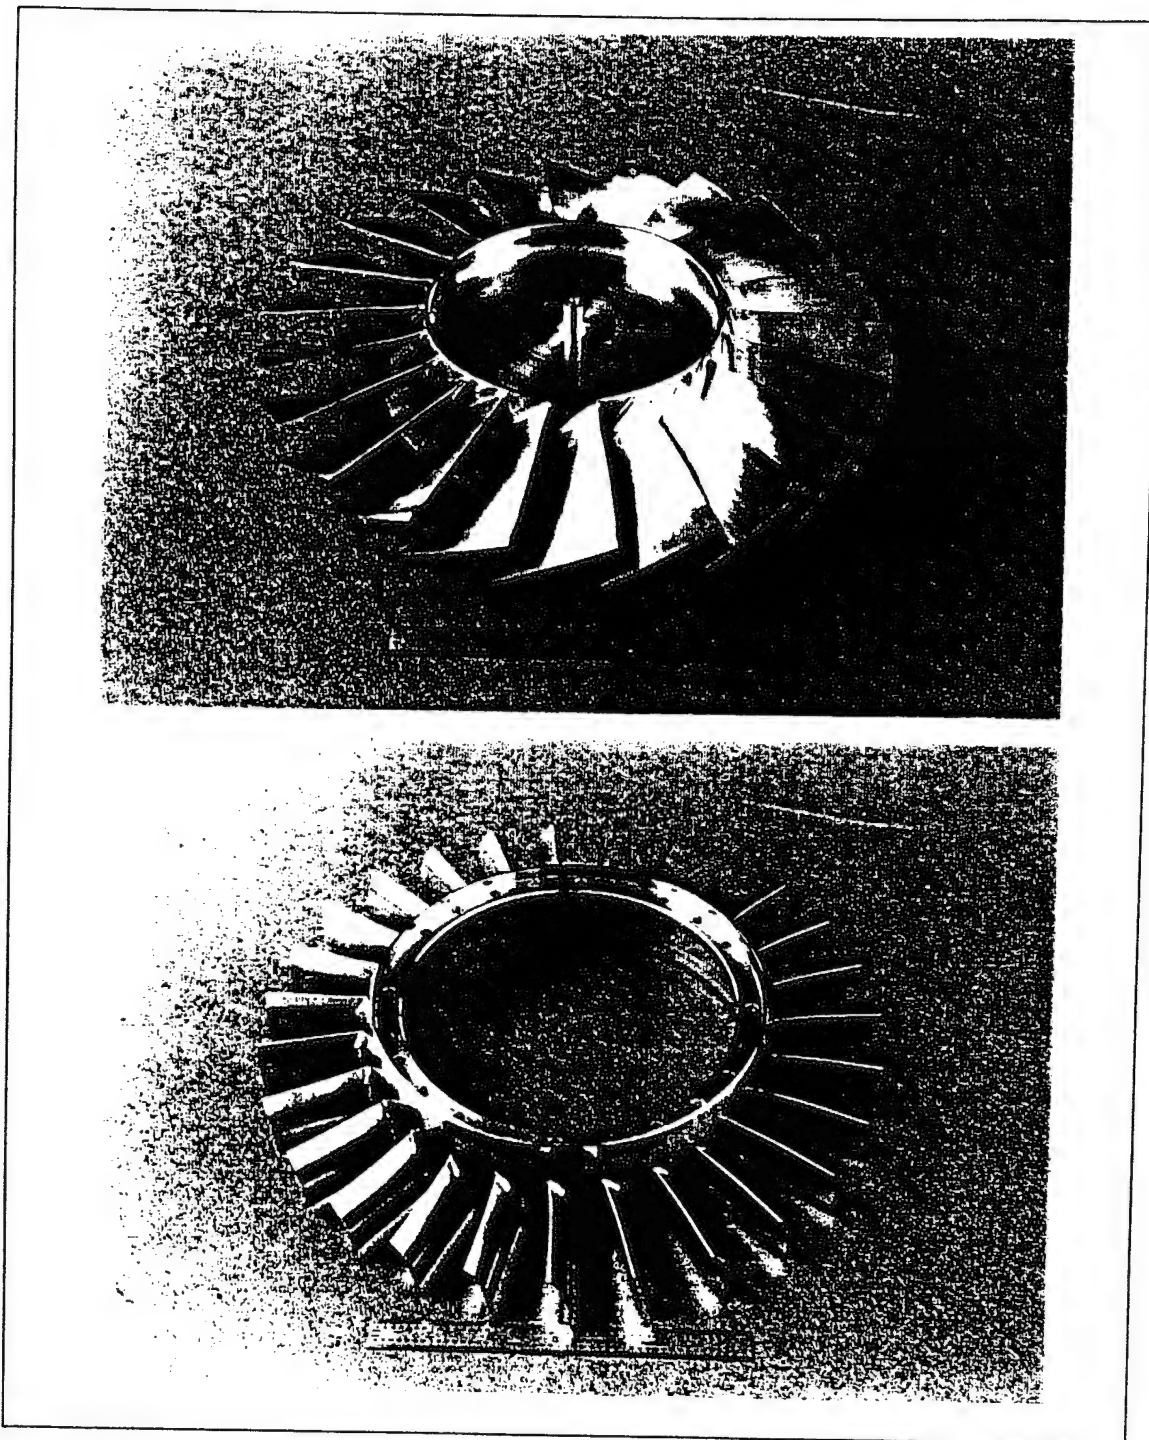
Manufactured Blading; Rotor (Top), Stator (Bottom).
